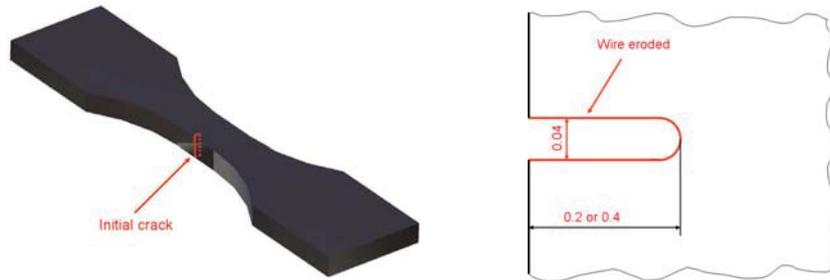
Position (l) and shape (r) of a wire eroded initial crack
